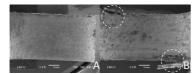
(A) Cryogenically machined & (B) dry machined sample
